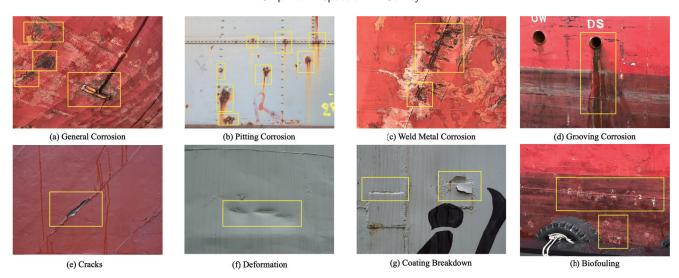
Eight types of hull defects which occur on the surface of the ship hull, including (a) general corrosion, (b) pitting corrosion, (c) weld metal corrosion, (d) grooving corrosion, (e) cracks, (f) deformation, (g) coating breakdown and (h) bio-fouling. Note that images (a-d) and (h) were published in the MaVeCoDD data set (Chliveros et al., 2021).
